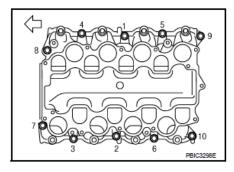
Identifying Intake Manifold Bolt Tightening Sequence (Lower) Courtesy of NISSAN MOTOR CO., U.S.A.
